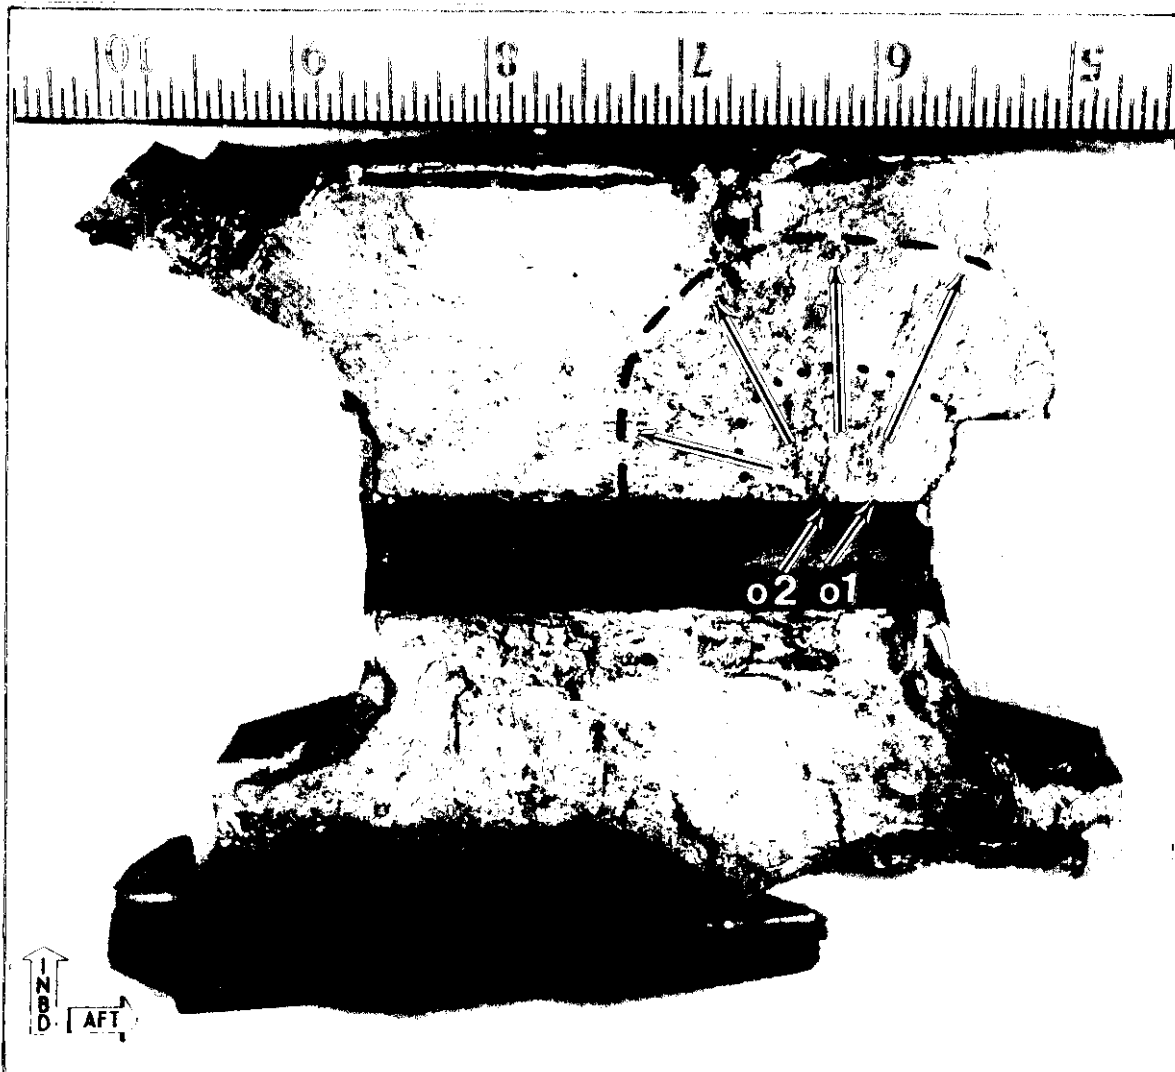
View of the fracture face on the segment of the hub labeled "1" in figure 1. Arrows "o1" and "o2" denote the two fatigue fracture origins. The extent of the fatigue fracture region is outlined by a dashed line. The discolored area on the fracture surface is outlined by the dotted line
